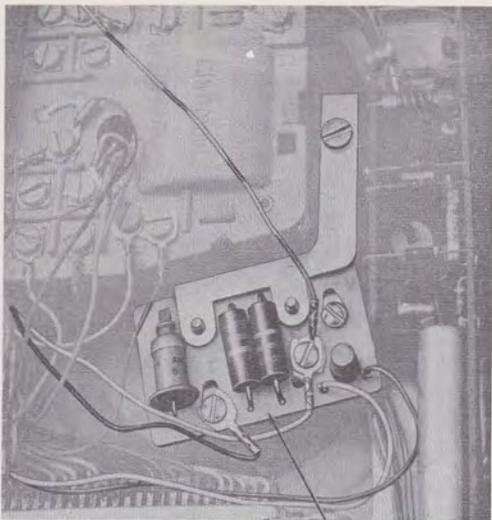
P-90D060 Polarity Guard Assembly Installed
